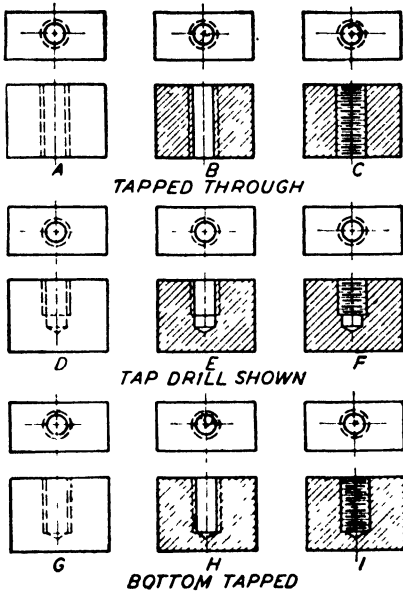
Internal thread symbols. American Standards (ASA Z14.1-1946).
